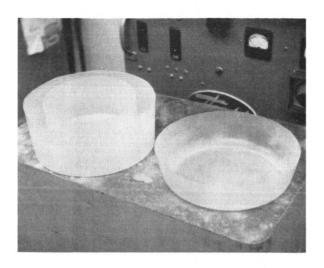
Ring and disk preform molds made of vacuum formed polypropylene sheet.
